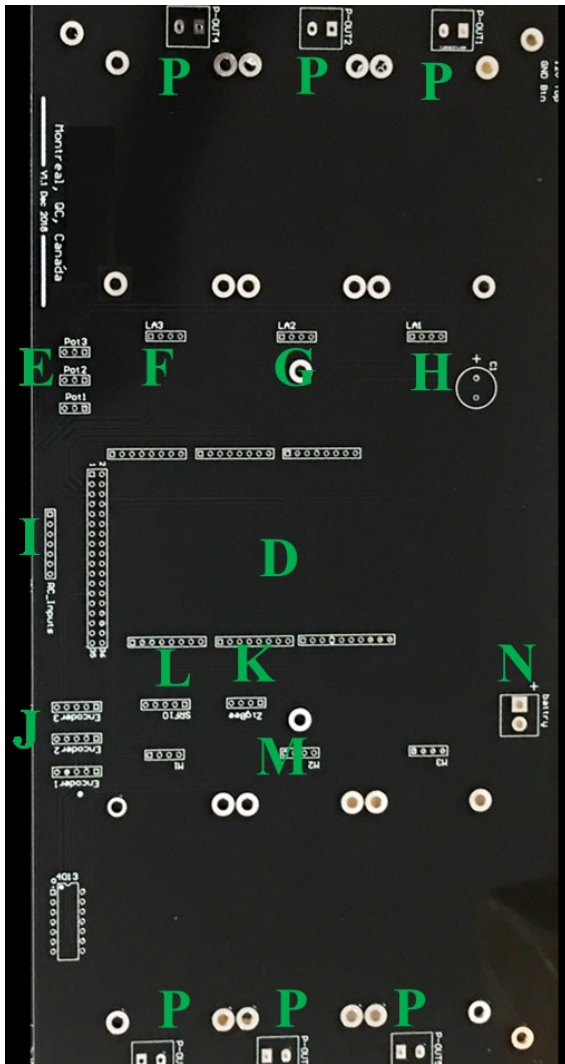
THE PCB BEFORE COMPONENT SOLDERING
